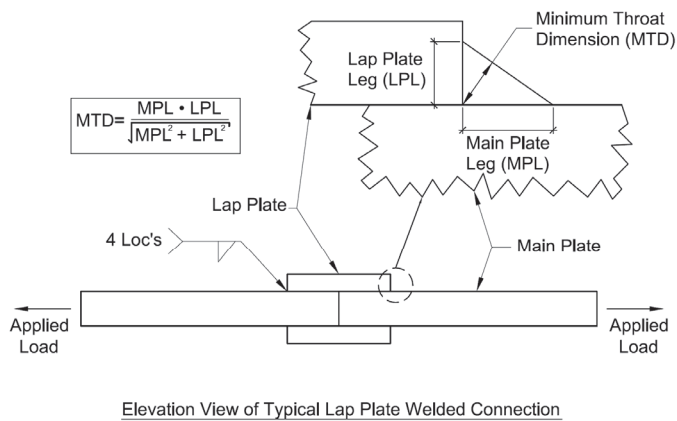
Fillet weld leg size measurement definitions.
